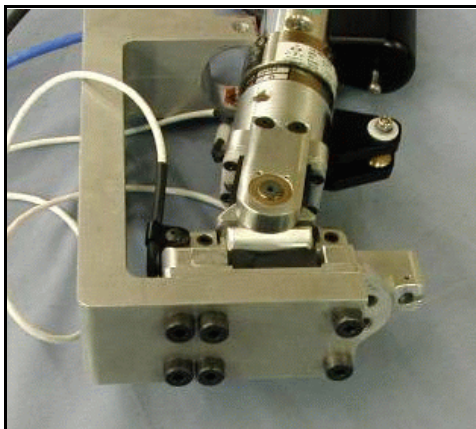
Attachment of Cal. Fixture to Bottom of Ankle
